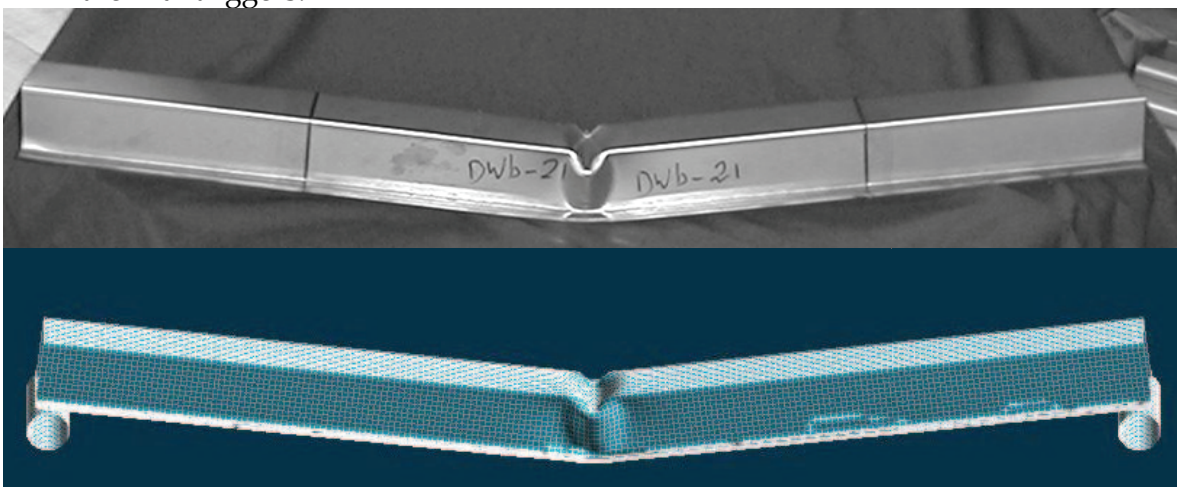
Experimental and numerical final deformed shapes for bending tests of tubes manufactured using laser welding and tailored blanks (DP600 + DP800)
